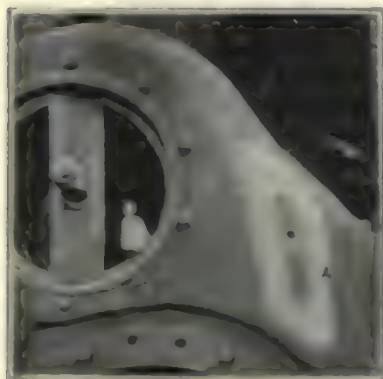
WELDING BROKEN WALL IN STEAM PASSAGE
